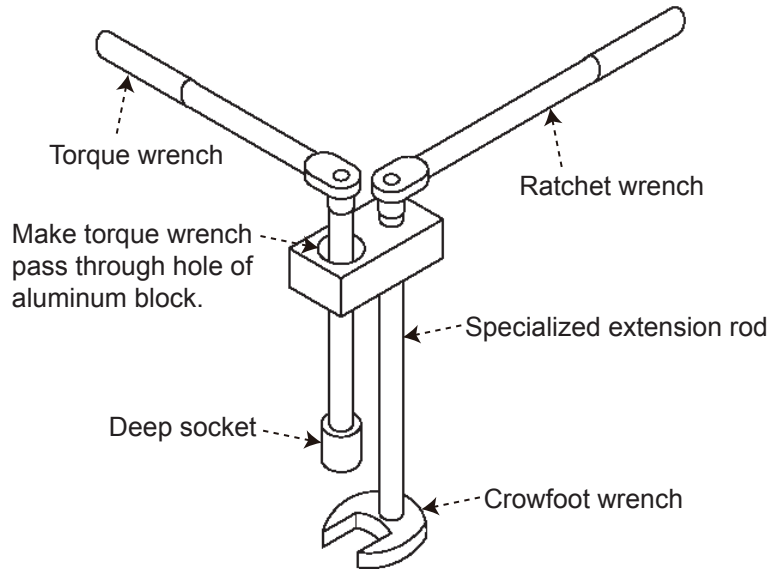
Specialized tool for dismounting the sirocco fan
